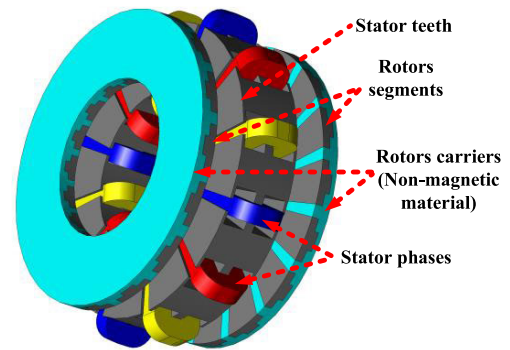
A 12/16 dual-rotor single-stator segmented-rotor AFSRM.
